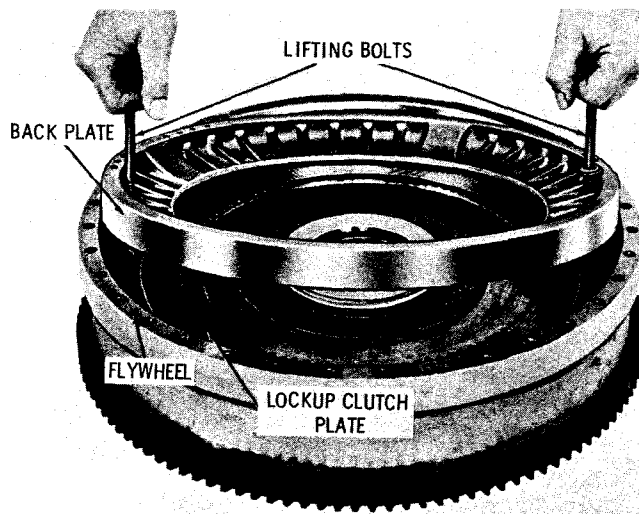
Removing lockup clutch back plate (CLT, CLBT, VCLT, VCLBT)
